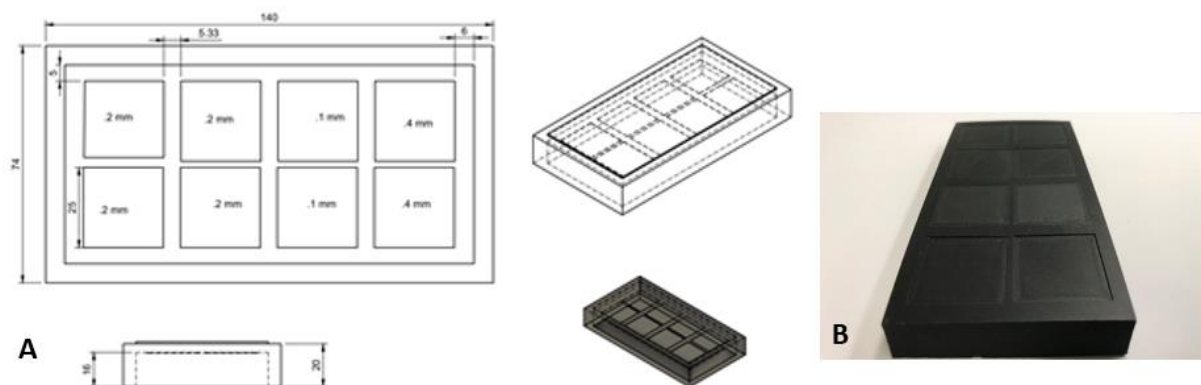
Mold schematic and final mold: A) 2D drawing of depression mold (mm), B) Silicon mold for film preparation.
